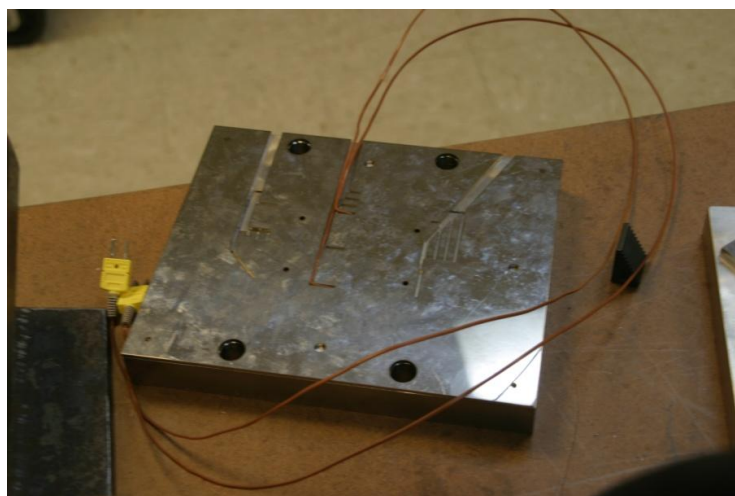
Machined stainless steel plate with inserted thermocouples.
